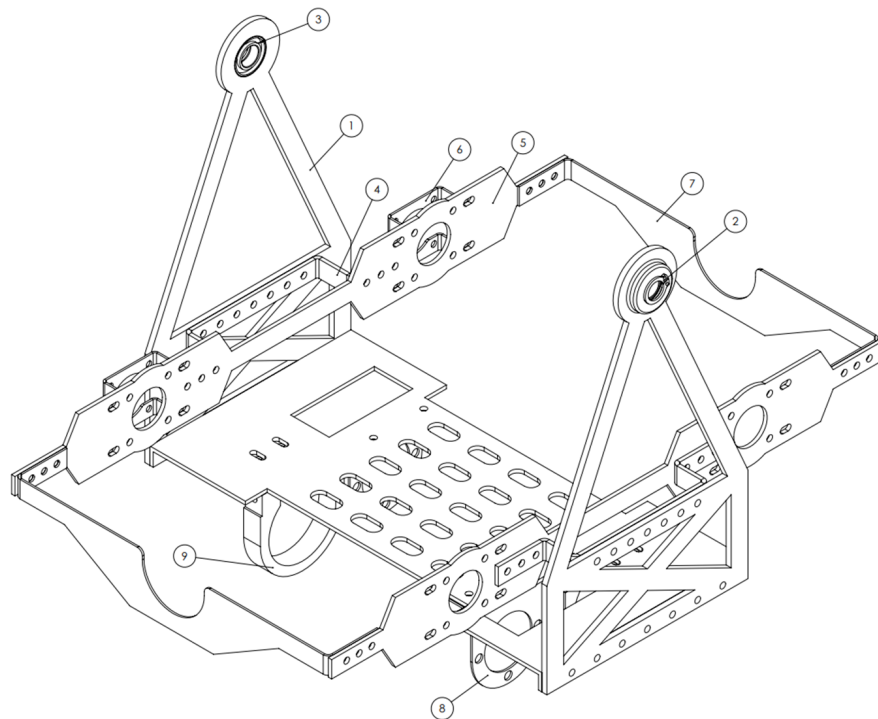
Isometric view of the Pendulum structure. The main components are: 1) Swinging rod, 2) Seeger, 3) Angular contact ball bearing, 4) Connecting plate, 5) CMG-holding plate, 6) Tilting motor plates, 7) Plate with spinning motor positioning hole, 8) Main motor positioning plate, 9) Main motor holding ring.
